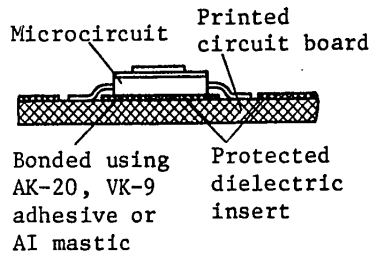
One-sided assembly of microcircuits on a printed circuit board.
